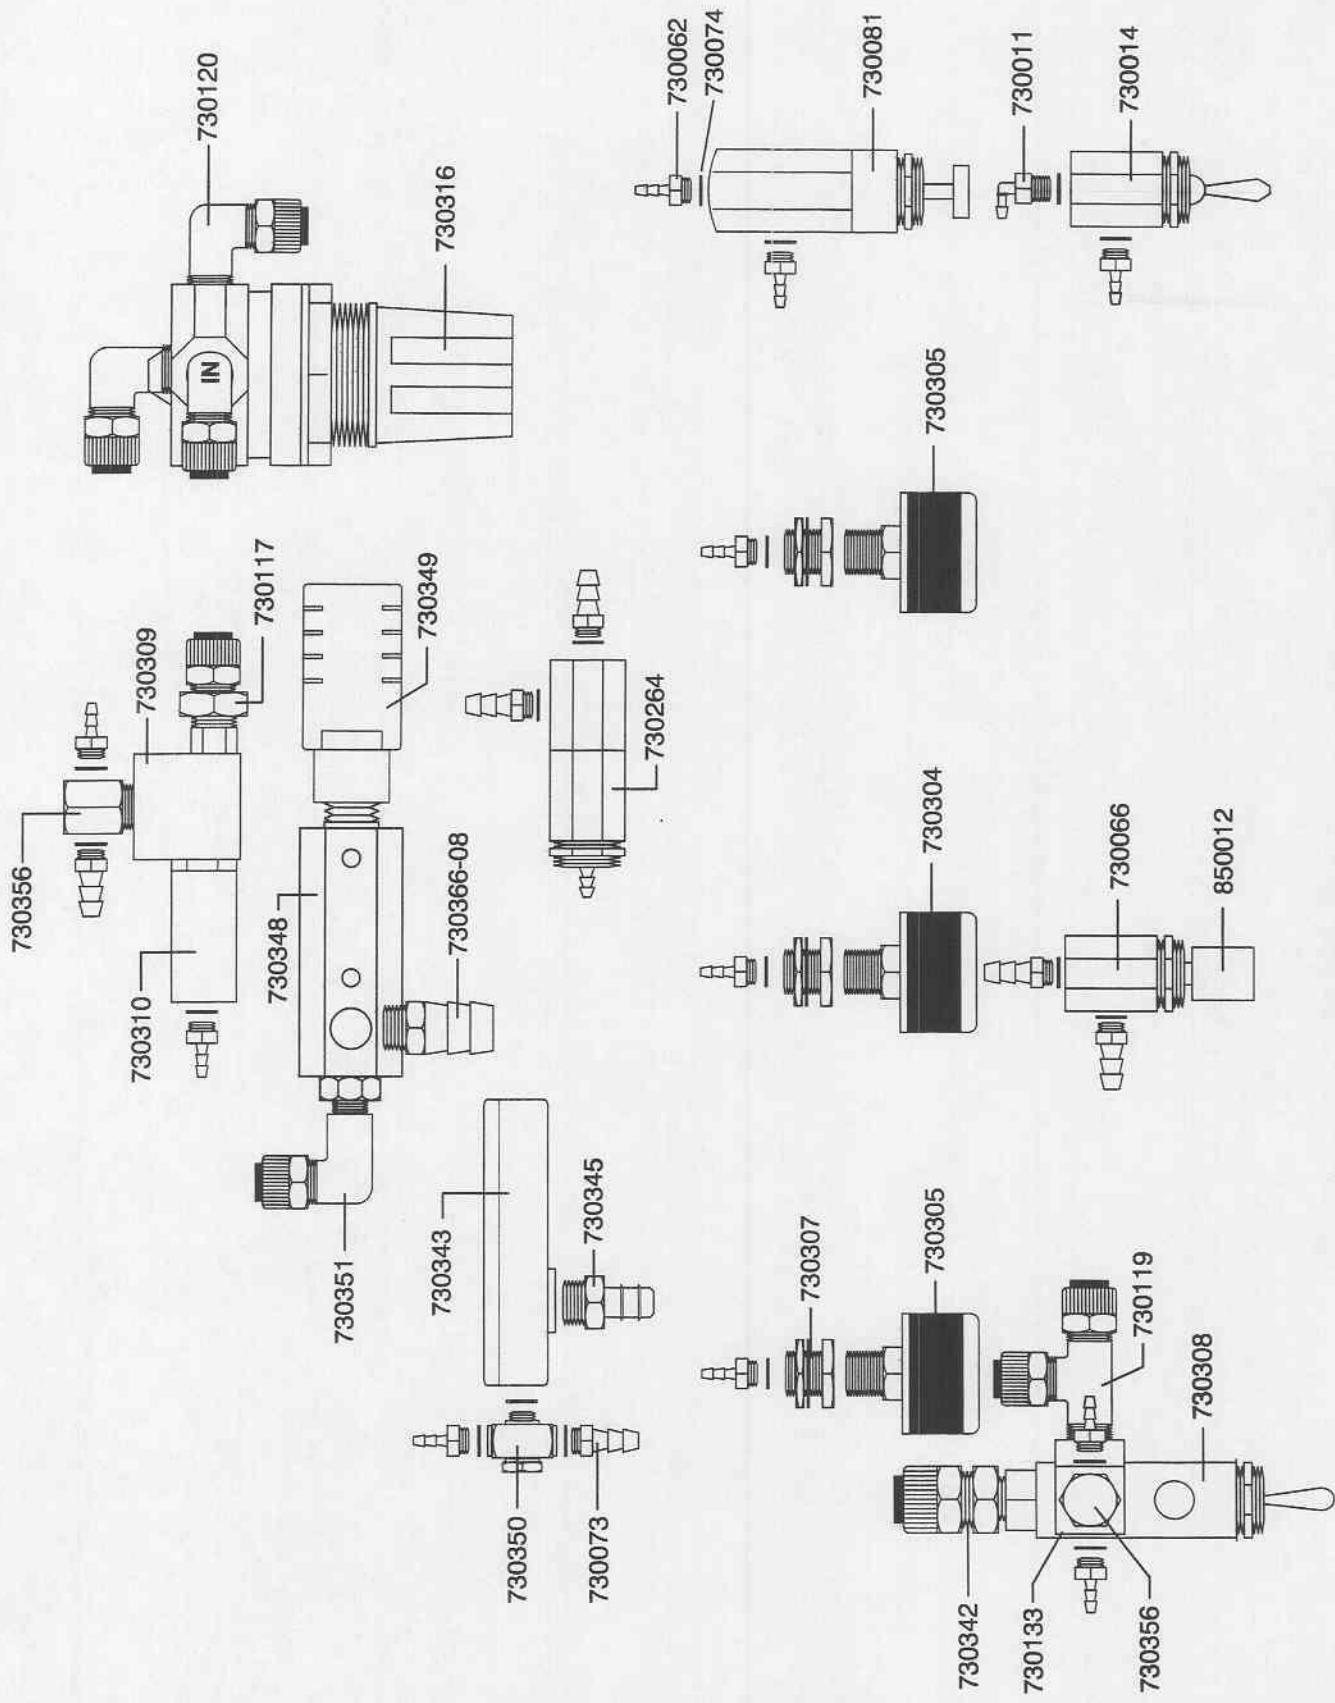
A - ILLUSTRATED PARTS LIST, VACUUM CONTROL
